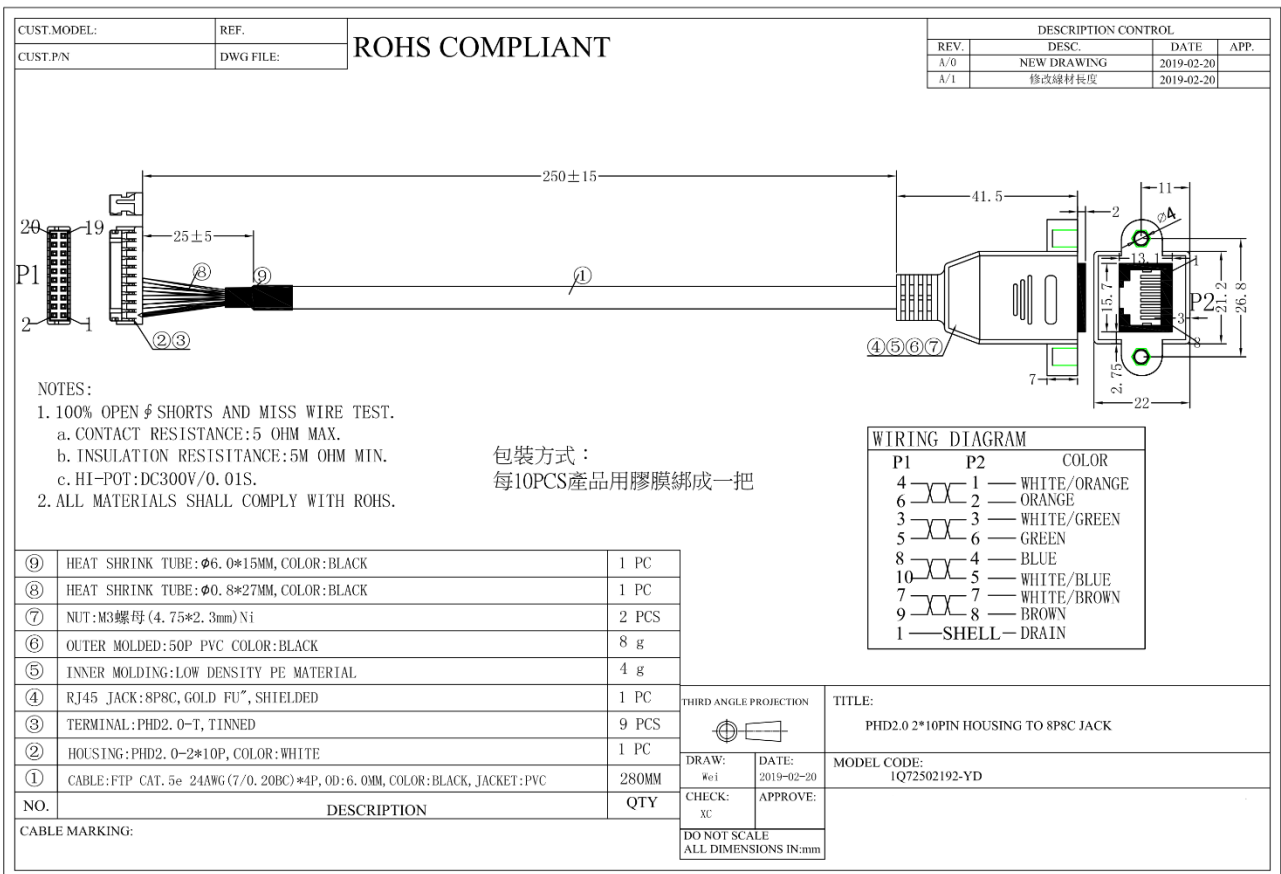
20pin Pitch 2.0 Connector to 1 RJ45 Cable Drawing
